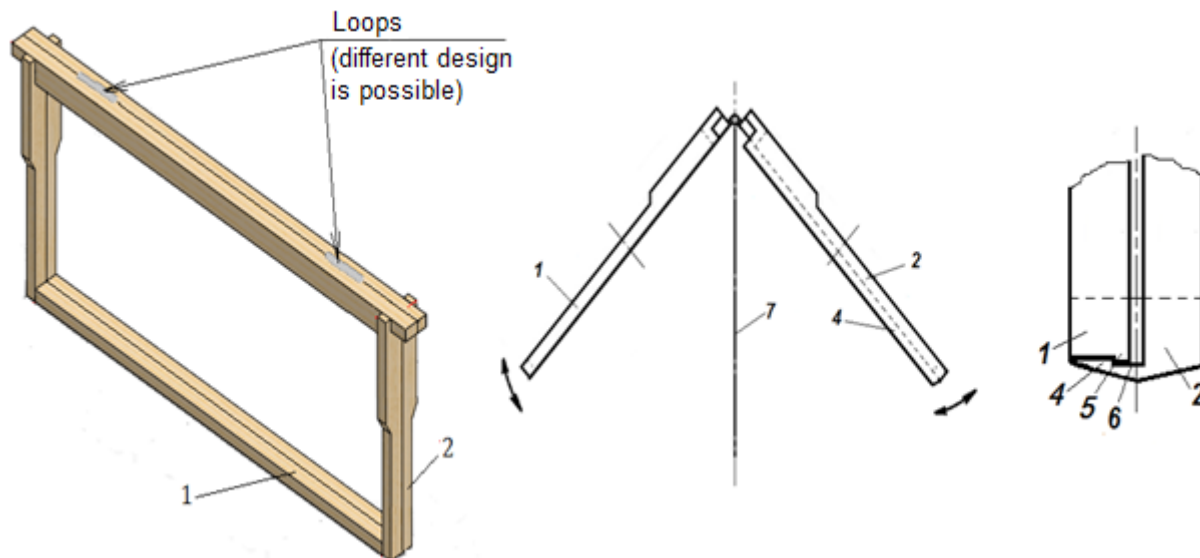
Appearance and structure of the shallow frame (half-frame) with quick fitting of a beeswax foundation
